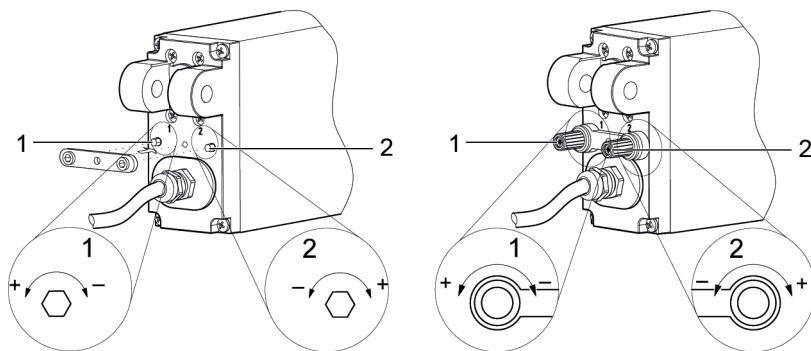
Housing cover with setting screws (left graphic) or with rotary knobs (right graphic)
